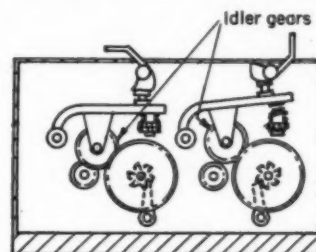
Below—Cross-section, showing idler-gear arrangement and pawl and ratchet gear
